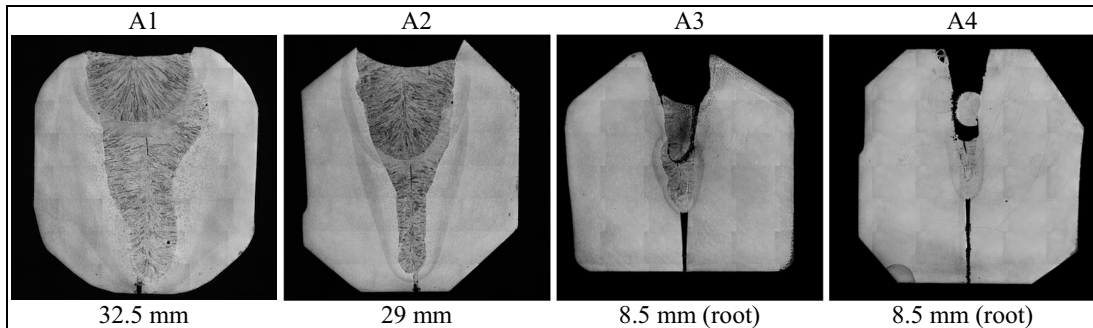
Weld macro-sections of the butt joint bended sections and their corresponding penetration depths with respect to the weld surface. For the flat position welds A1 and A2 deep penetrations were obtainable whereas the vertical down welds A3 and A4 could not hold on to the filler material.
